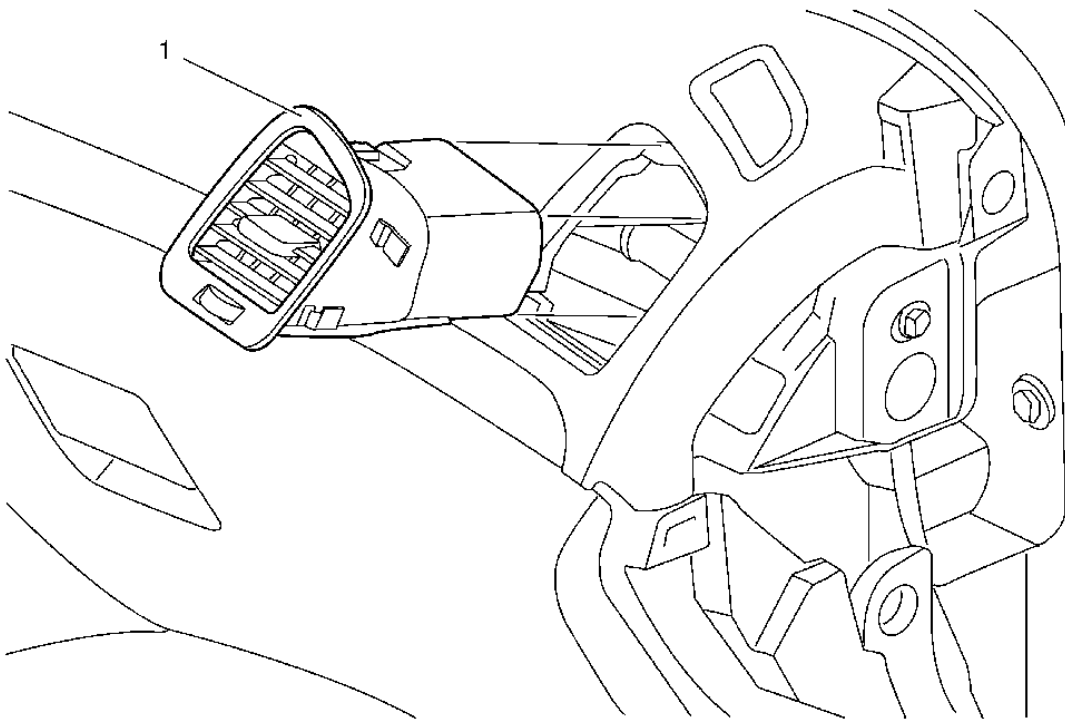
Instrument Panel Outer Air Outlet Deflector - Right Side
